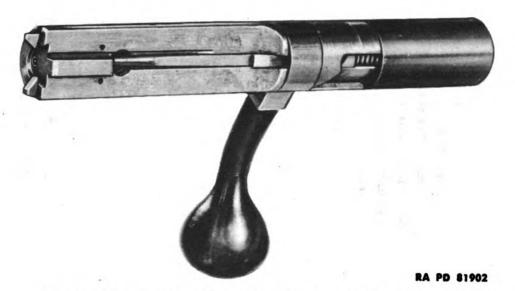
Breech Bolt Assembly of Winchester Rifle, Cal. .22, Model 75
